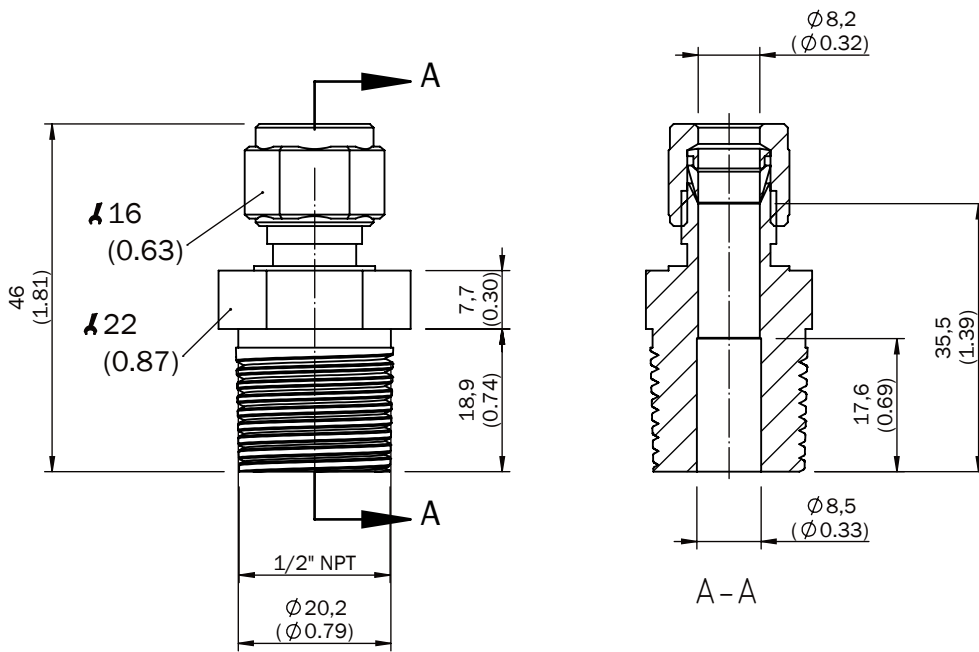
Dimensional drawing adapter 1/2" NPT (p/n 5338775)
